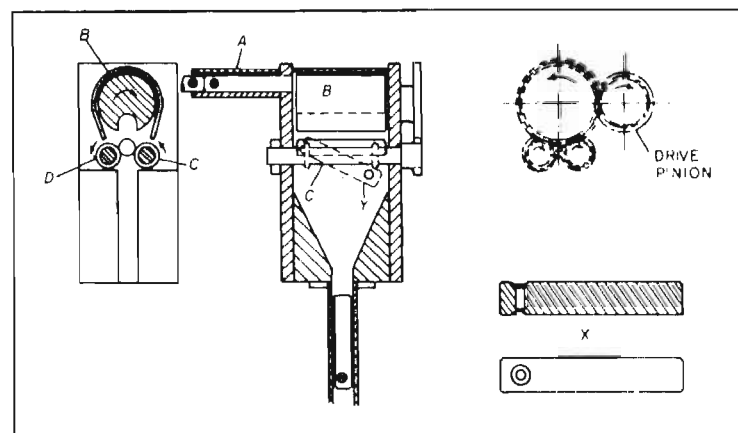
Mechanism for feeding roller pins to assembly machine with drilled end downward.
